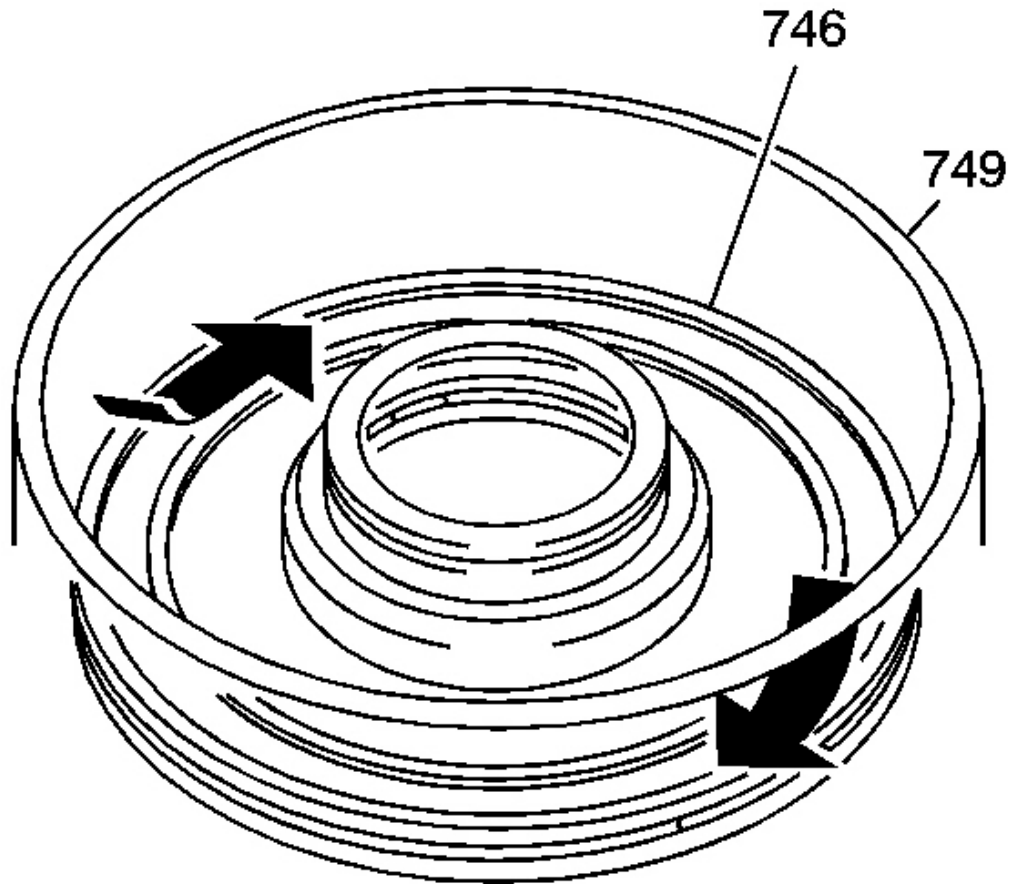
Installing The 2nd Clutch Piston Into 2nd Clutch Housing
